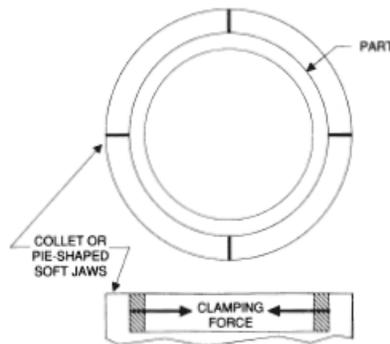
When the part can only be clamped on its outside surface, pie-shaped chuck jaws can be used to hold the part and reduce deformation.
